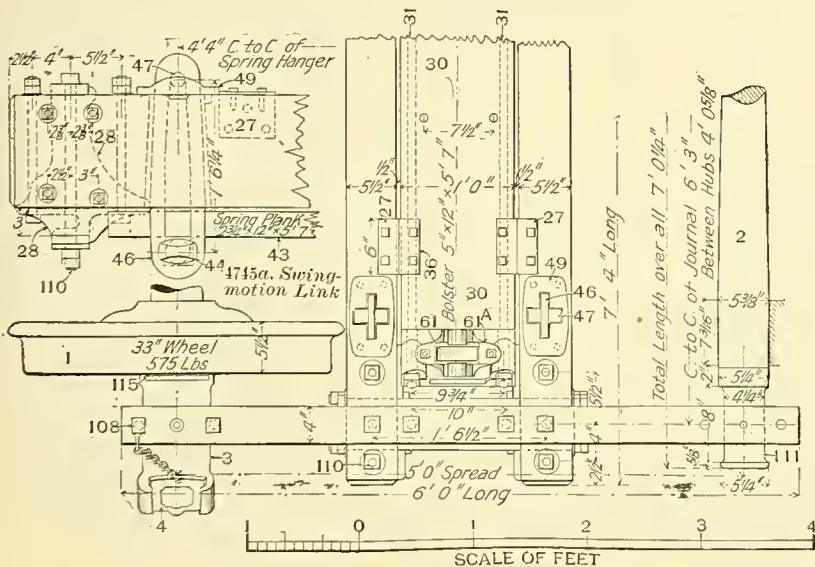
Part Plan and Side Elevation of Bolster and Hanger.
